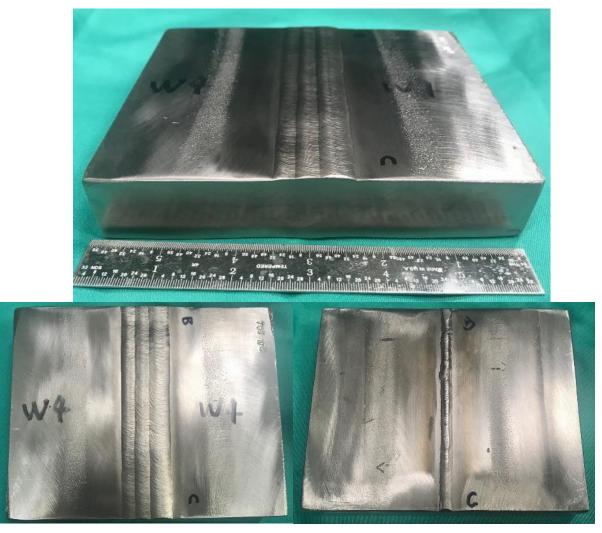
W4 weld: code qualification weld on Alloy 709 ESR SA1100 plate. P level in weld wire: 140wppm, P level in base metal plate: 140wppm.
